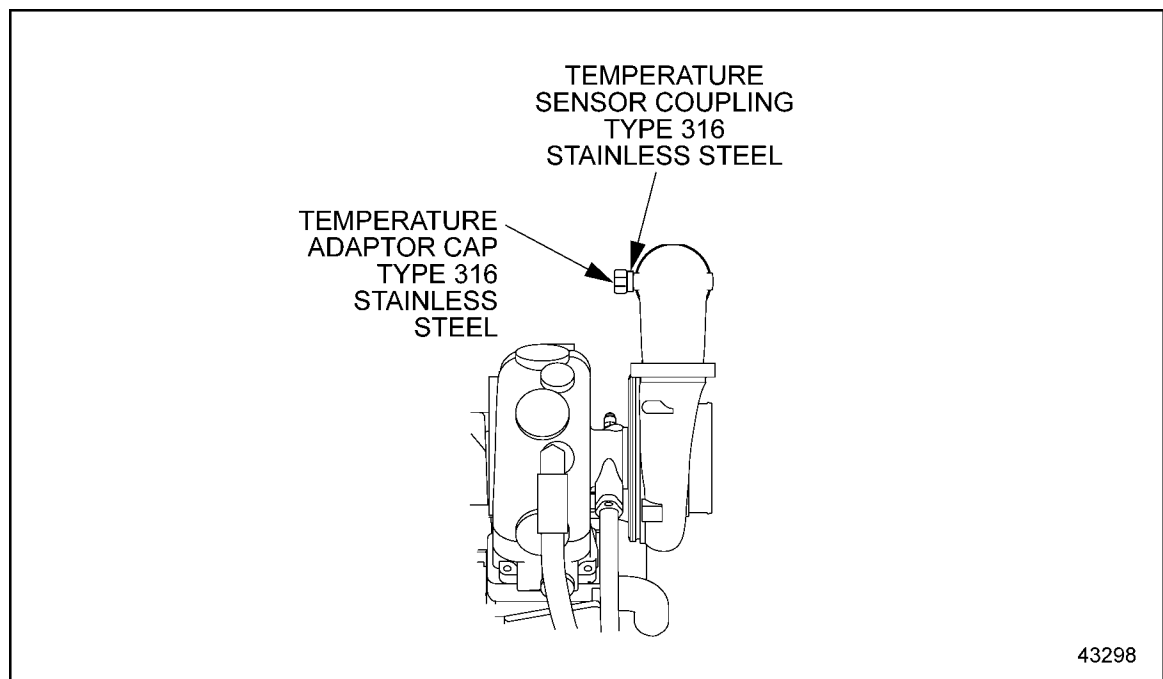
Temperature Sensor Coupling Prepared for Welding
